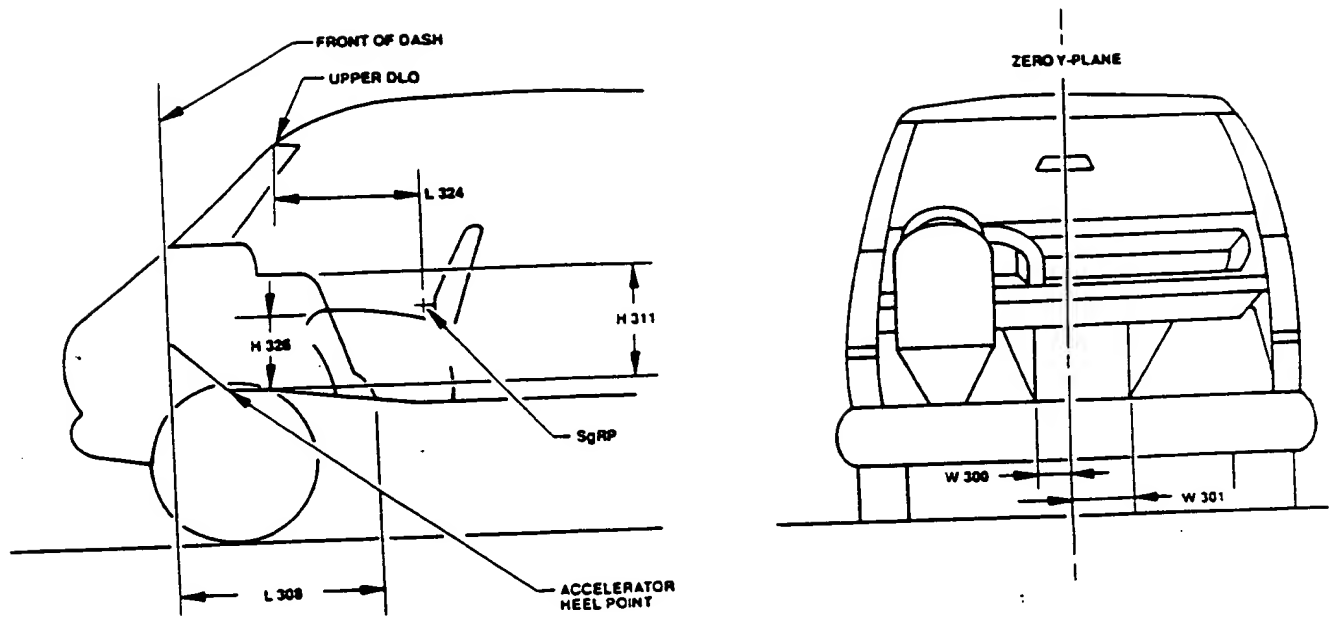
TRUCK INTERIOR DIMENSIONS, ENGINE COMPARTMENT
